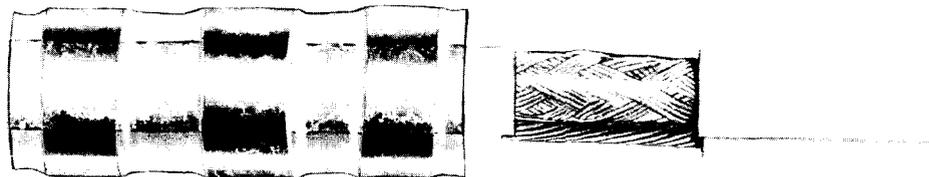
Solder Sleeve, 0.25 Inch, 360 Degree Opening
